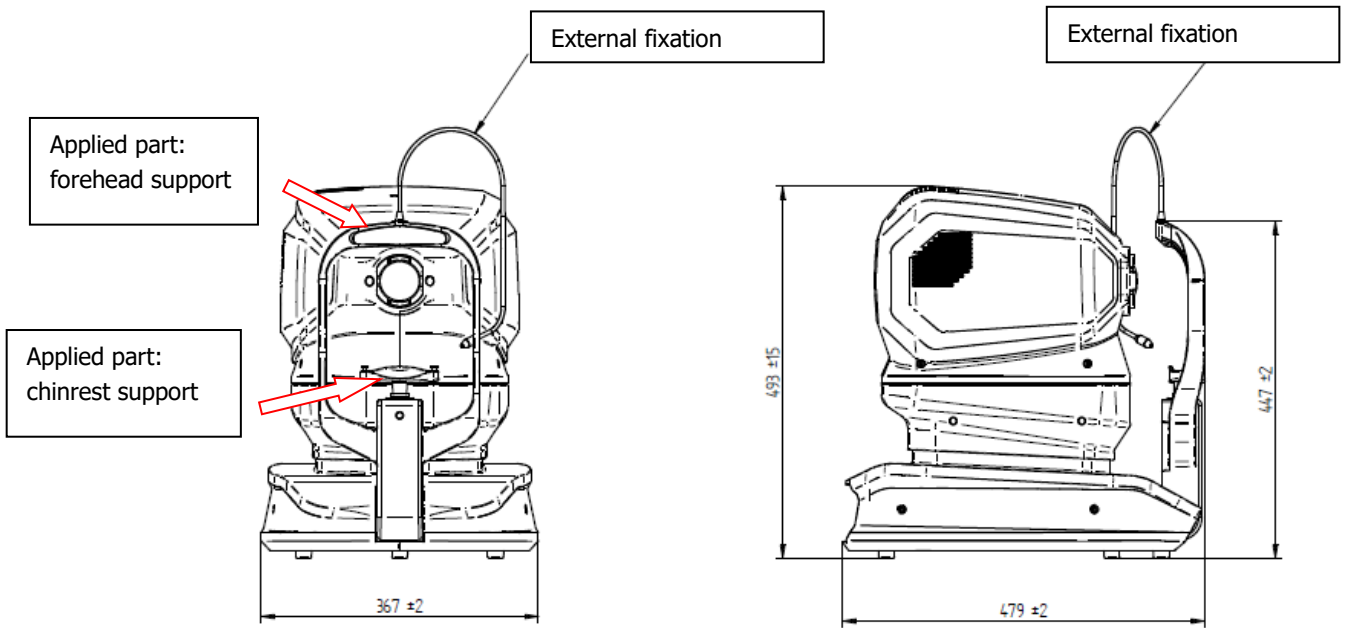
The chassis (front and side), applied parts and external fixation of the REVO FC
